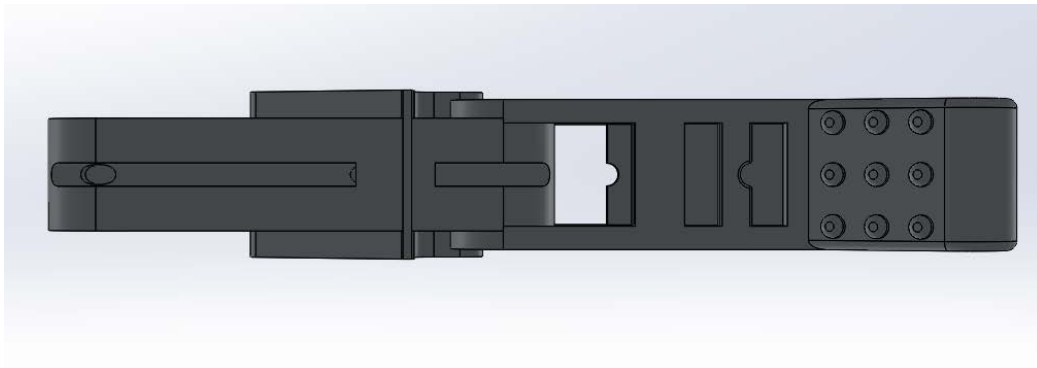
Two-Segment Finger; Sub-Assembly; Bottom View
